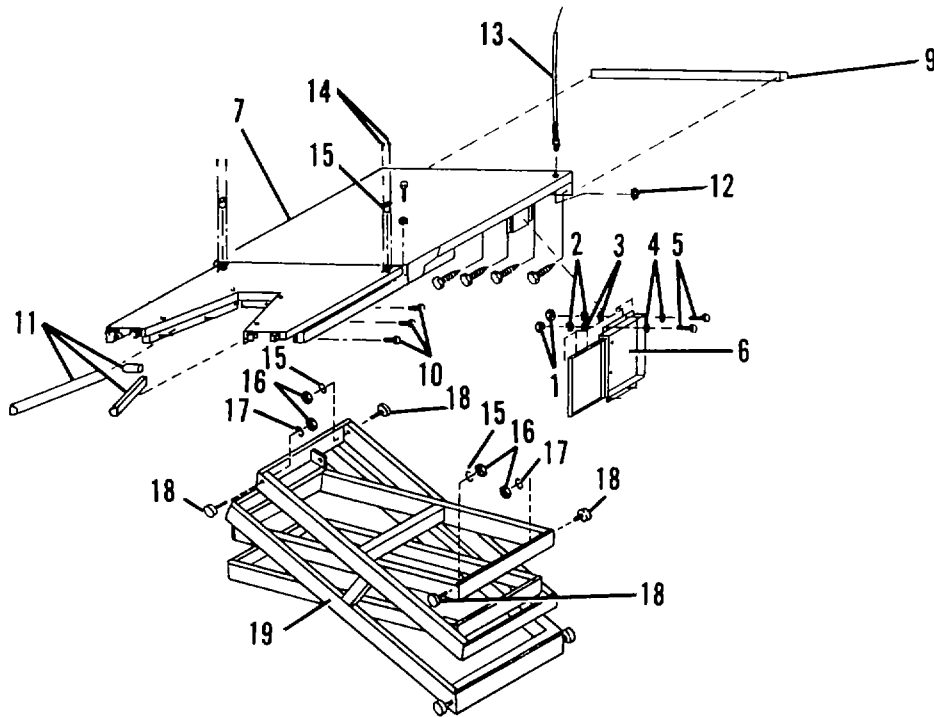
Platform Mounting (Sheet 2 of 2).
